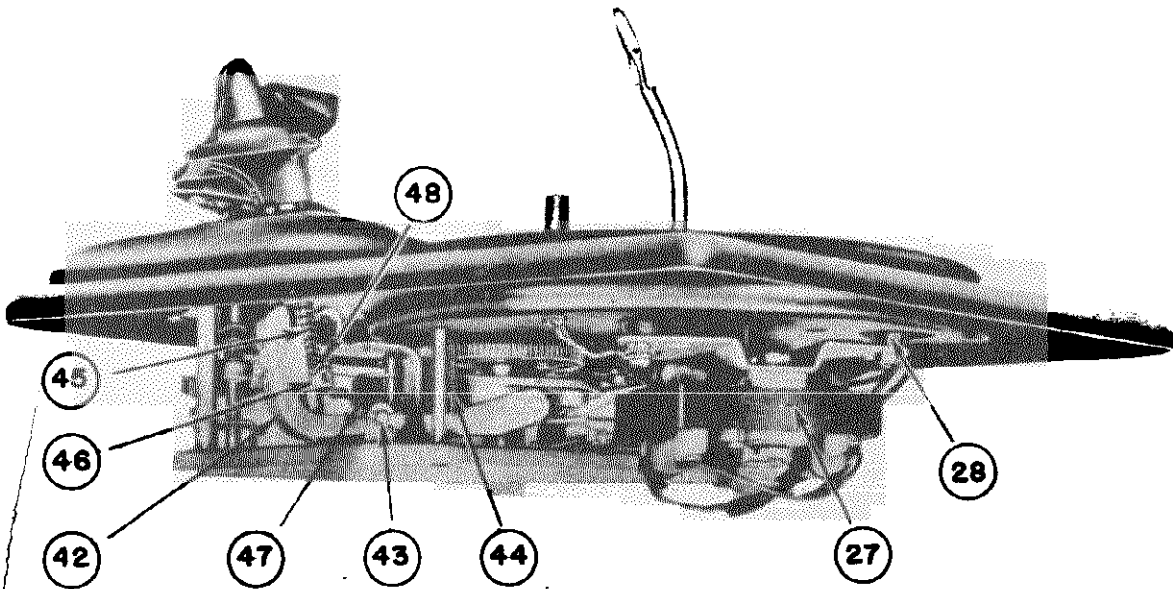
PARTS LOCATION -- LEFT SIDE VIEW
